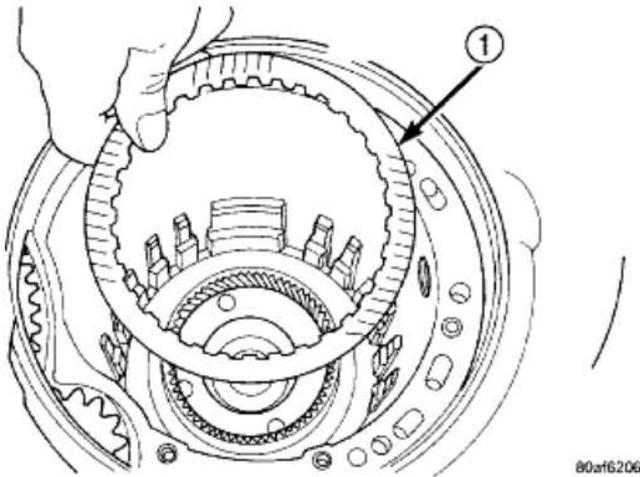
Removing/Installing Low/Reverse Clutch Disc
